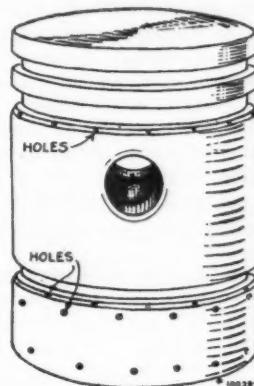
How a reader machined pistons to eliminate excessive oil pumping
